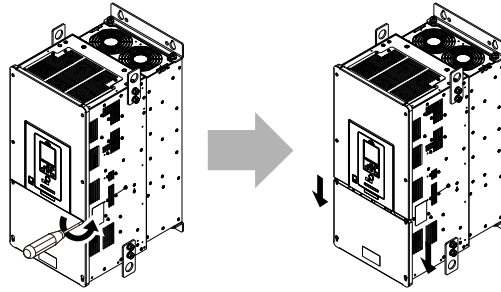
Loosen the Terminal Cover Mounting Screws
